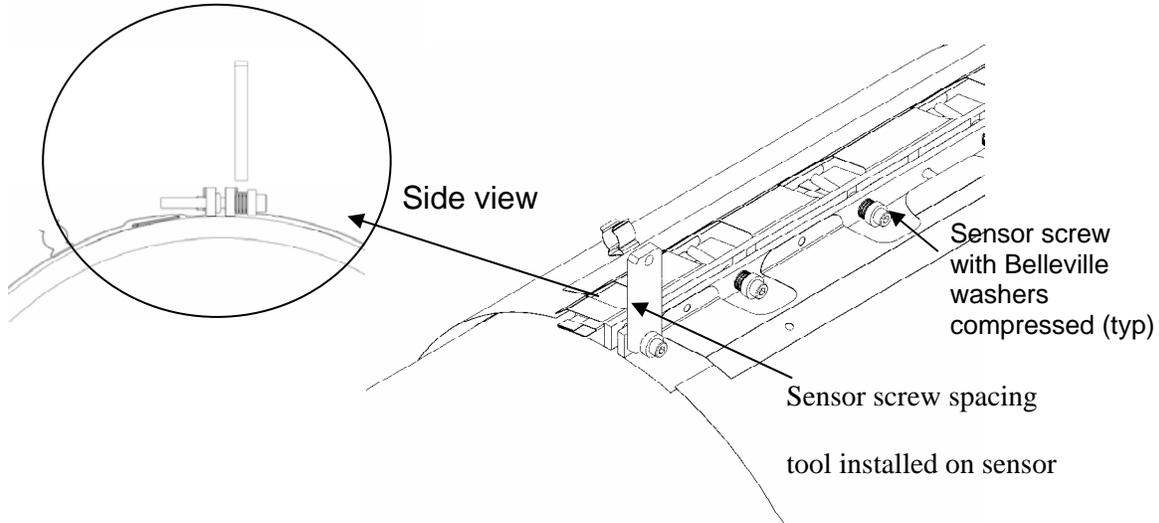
Sensor Band Spacing Tool Installed on Sensor Screw
